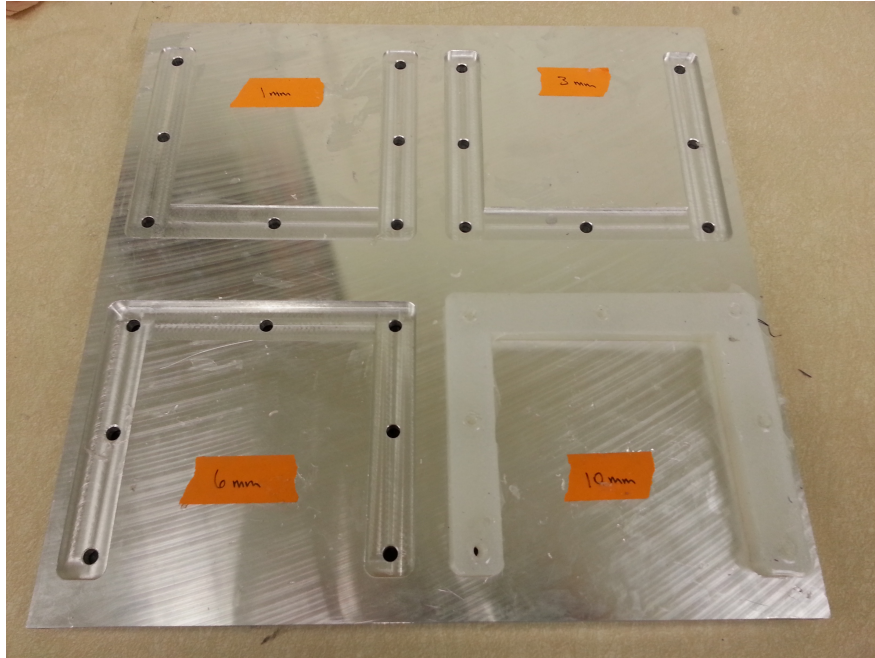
This aluminum sheet was milled to create a molding for the silicone spacers.
